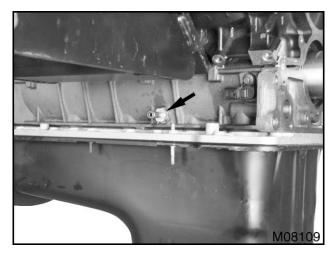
Breather oil drain assembly to crankcase M12 fitting
